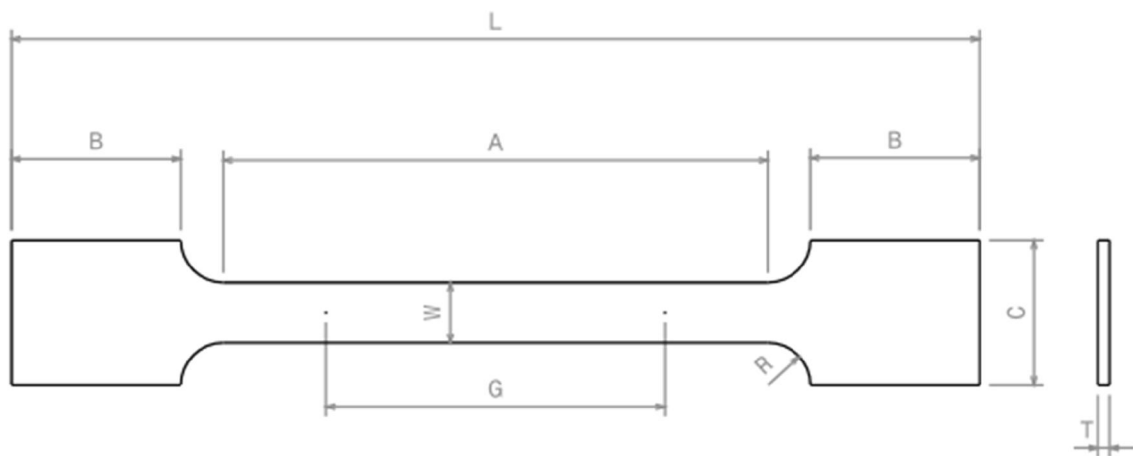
ASTM E 8/E- 8M - 08 Standard Rectangular Tension Test Specimens Dimensions
